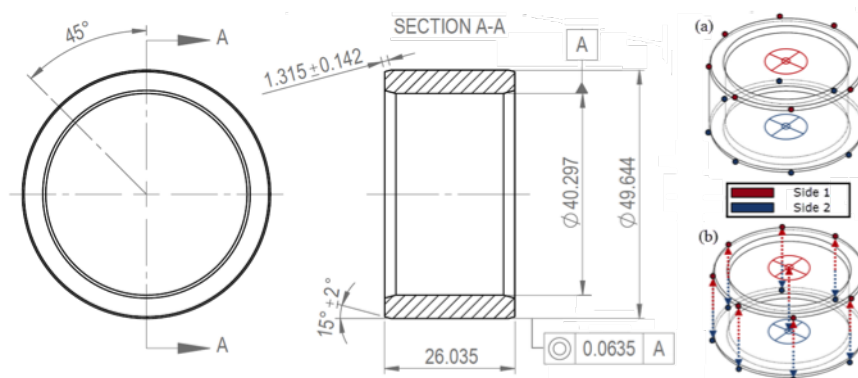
Baseline bearing model outer race, with section view indicating key geometric features with tolerances (dimensions in mm), and isometric views indicating the measurement points (a) on either side of the bearing, (b) between bearing sides
